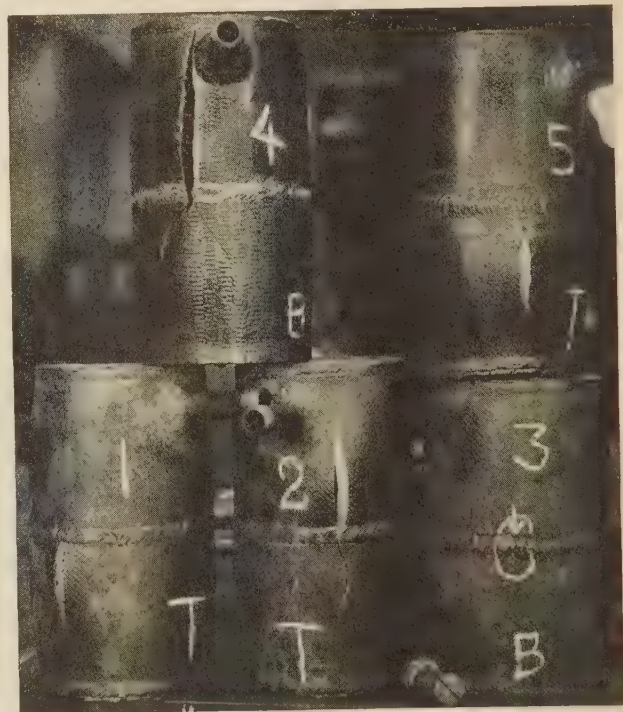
SPECIMENS OF 6-IN. STANDARD-PIPE BUTT WELDS BROKEN BY INTERNAL HYDRAULIC PRESSURE
